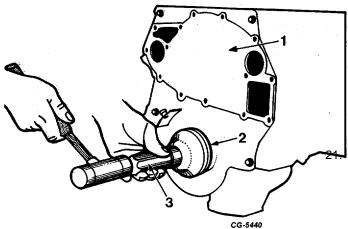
Installing Engine Front Cover Oil Seal with Cover Assembled to Cylinder Block Using SE-1949 Installer
